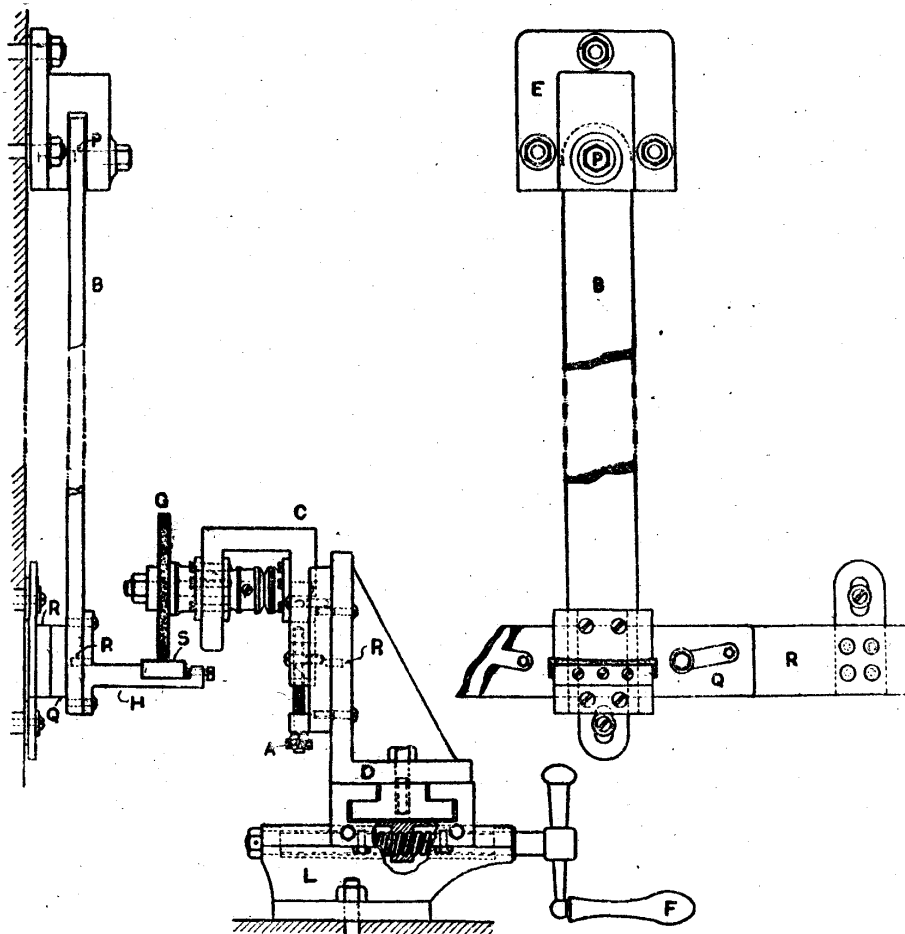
Device of grinding out the cylindrical surfaces of a crystal holder.
